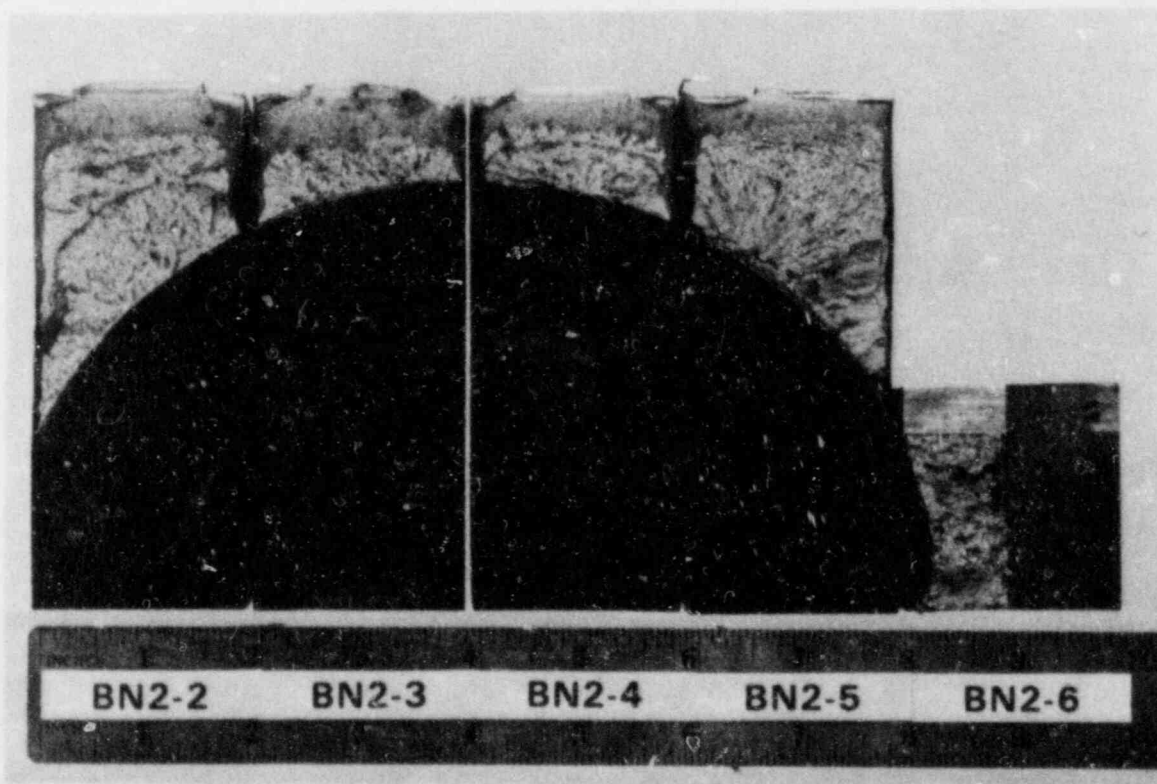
Lower Fracture Surface for Flaw B.
